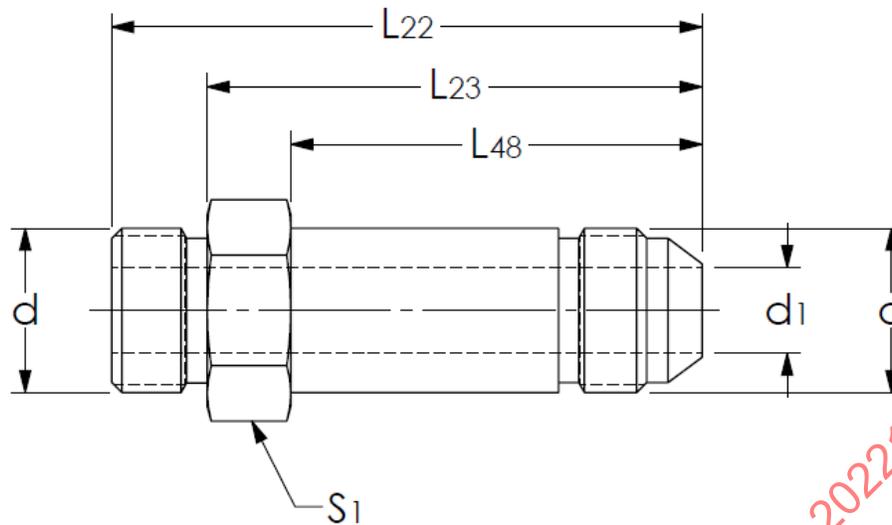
Straight thread connector - Long (071720, 07M1720)
